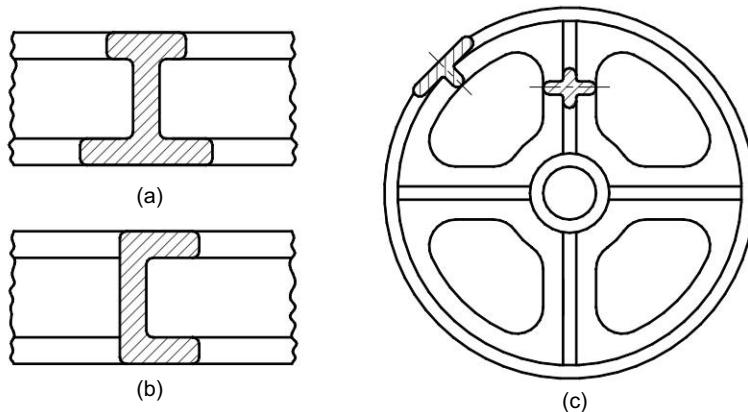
Revolved section (a) Shaft of I- section (b) Shaft with U section (c) Flywheel
